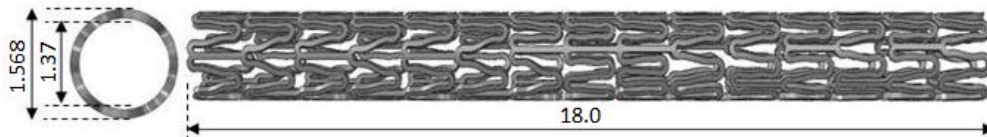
CAD model of the Multi-link Frontier stent. Dimensions (mm) represent length, internal diameter and external diameter.
